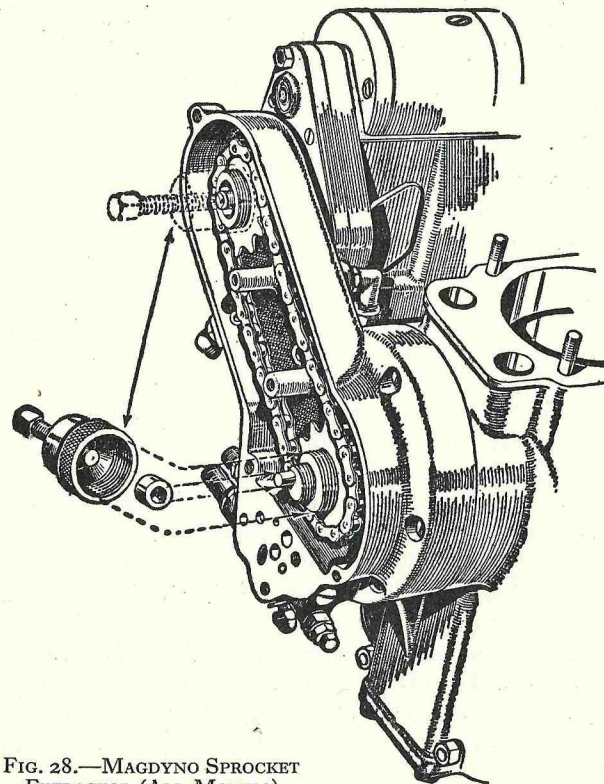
MAGDYNO SPROCKET EXTRACTOR (ALL MODELS).
